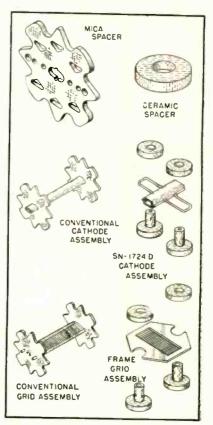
Comparison of conventional assemblies with ceramic assemblies
